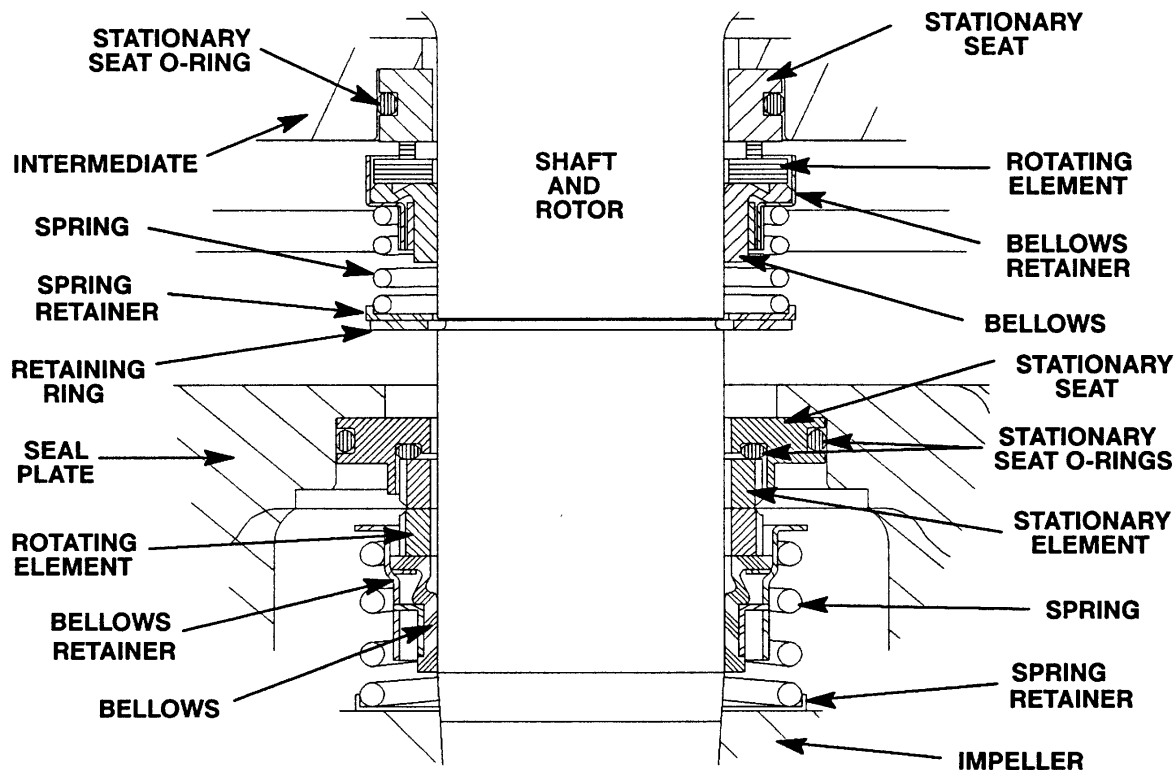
46512-055 (Lower) And 25271-947 (Upper) Seal Assemblies
